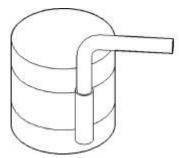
Piston Ring Compressor C-385 Courtesy of CHRYSLER LLC
